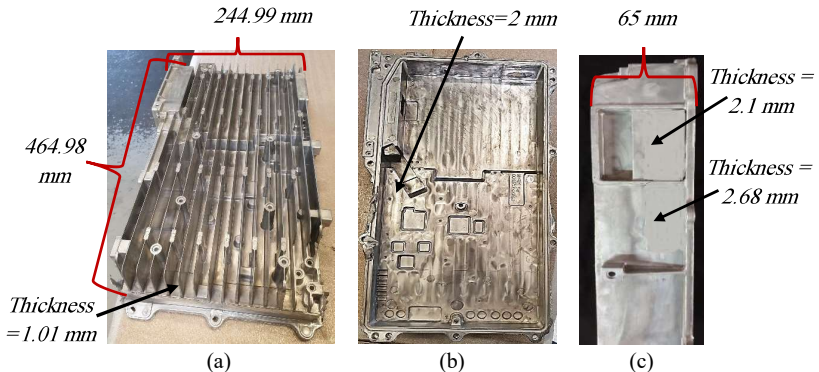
(a) The top view, (b) the bottom view and the (c) side view of the part.
